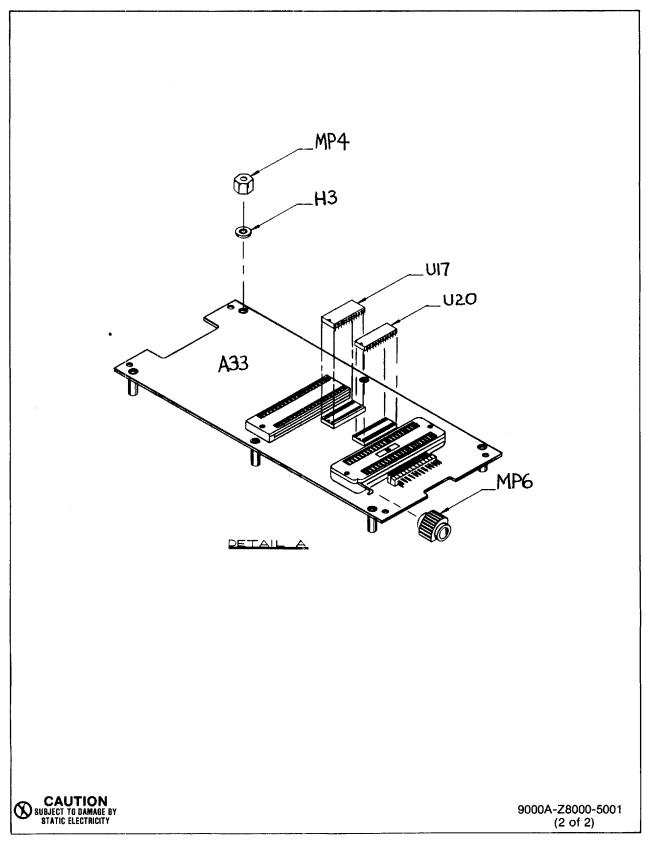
9000A-Z8000 Final Assembly (cont)
